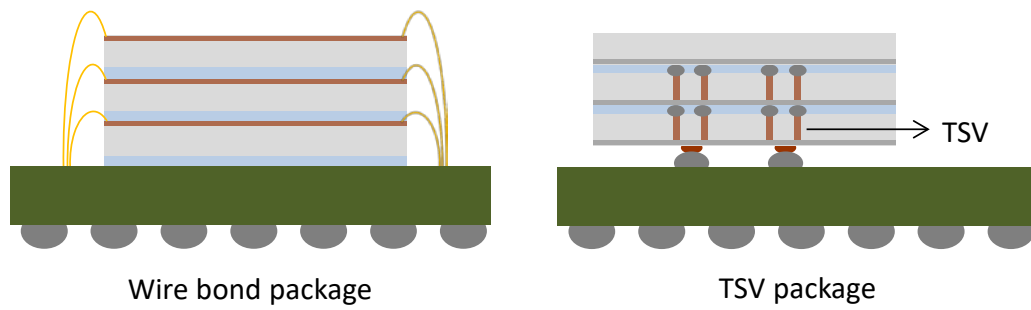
Schematic diagram of packaging technology using wire bonding or TSV.
